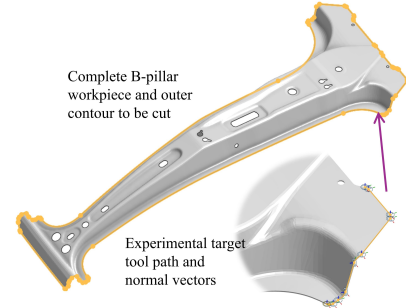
Overview of B-pillar workpiece and the path focused on the experiment
